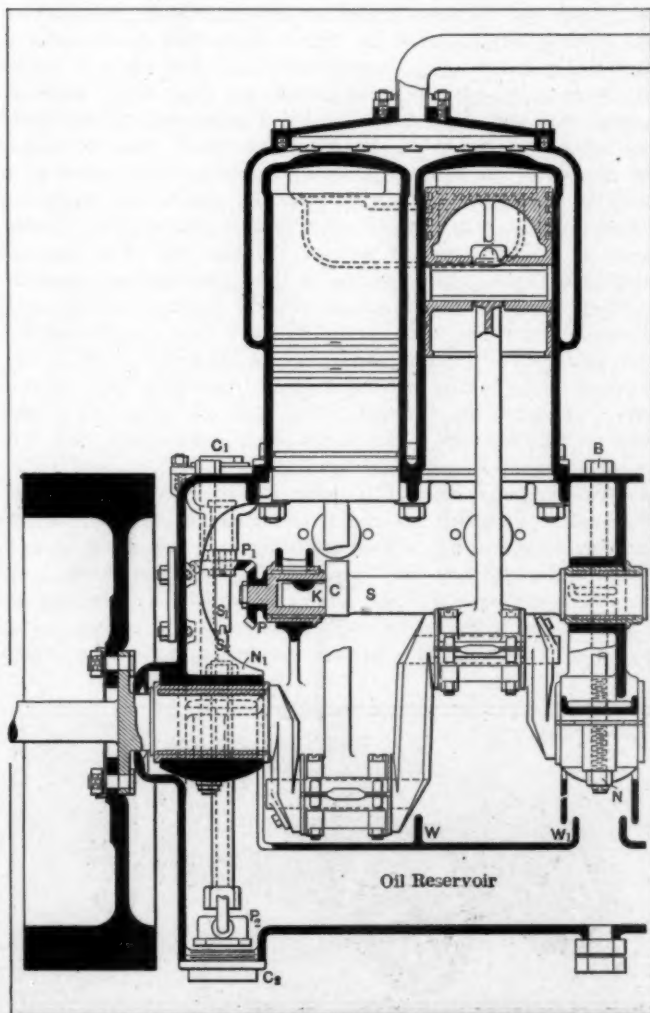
Section of two rear cylinders, showing cam and crankshafts
